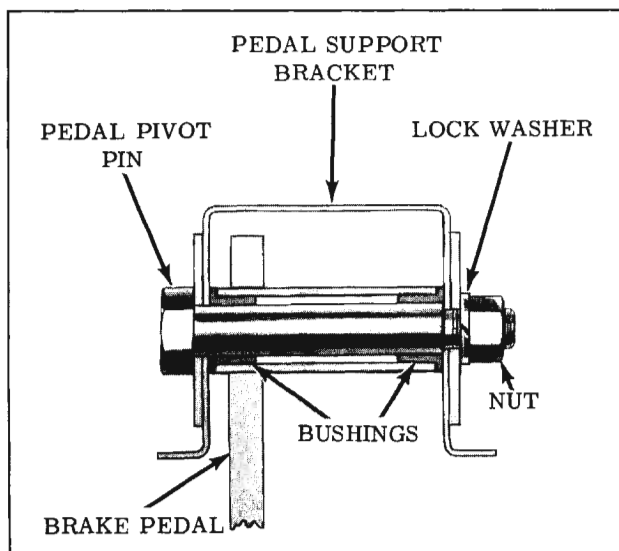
Hydra-Matic Brake Pedal Attachment
